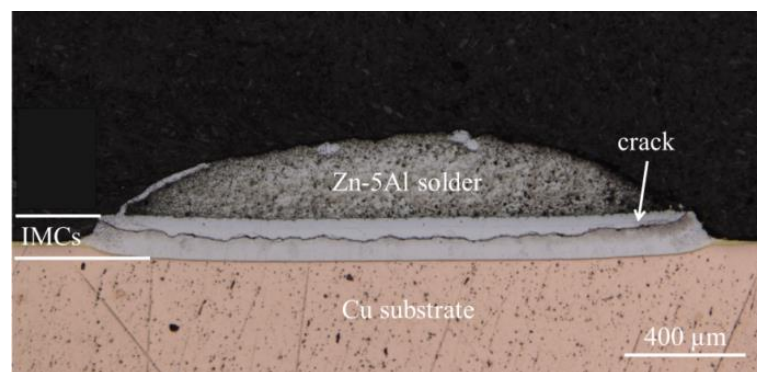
Cross section of the Cu/Zn-5Al solder interconnect with a crack.
